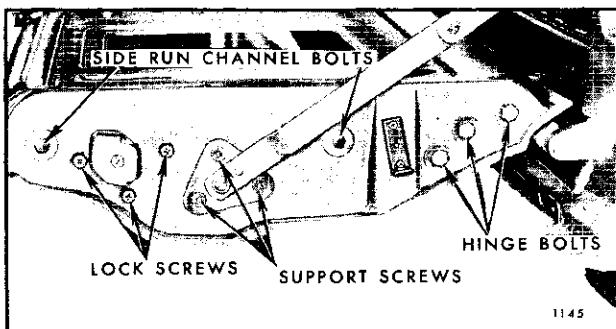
Tail Gate Lock and Support - "B" Body Styles
